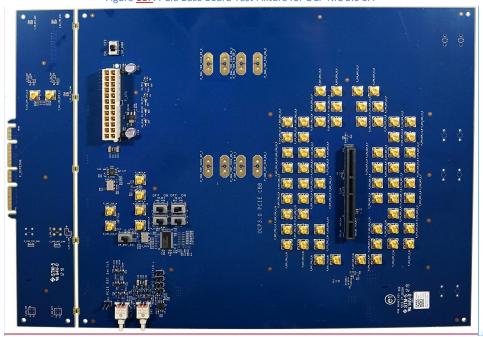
PCIe Load Board Test Fixture for OCP NIC 3.0 SFF
